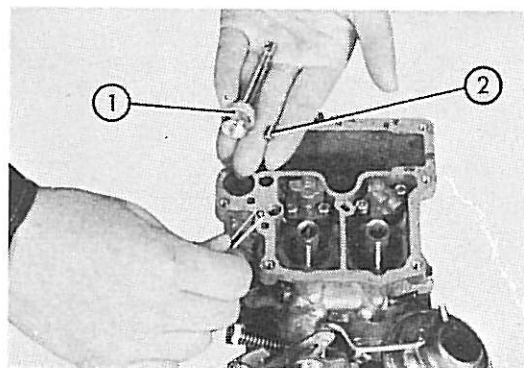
Assembling Pump Plunger, Steel Ball and Discharge Weight
